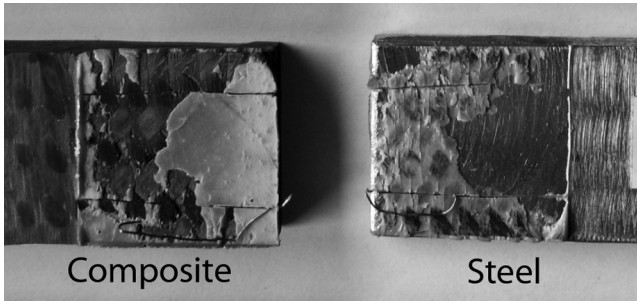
Fracture surface of a SC 25.4 joint.
